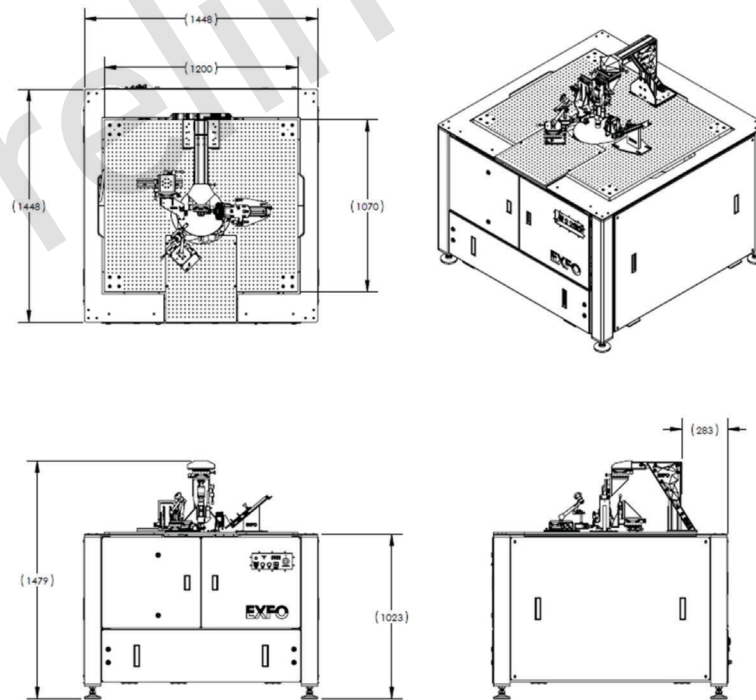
Technical drawing of the OPAL-EC-300 main system with dimensions in millimeters. Shown here with one (1x) PRO-P60 optical head and one (1x) PRE-00 manual electrical head. Not shown are the included the industrial rackmount PC, and the IT Kit (monitors, keyboard, mouse). Not shown are the chiller and the thermal chuck controller included with the (-TCH option). Non-final.
